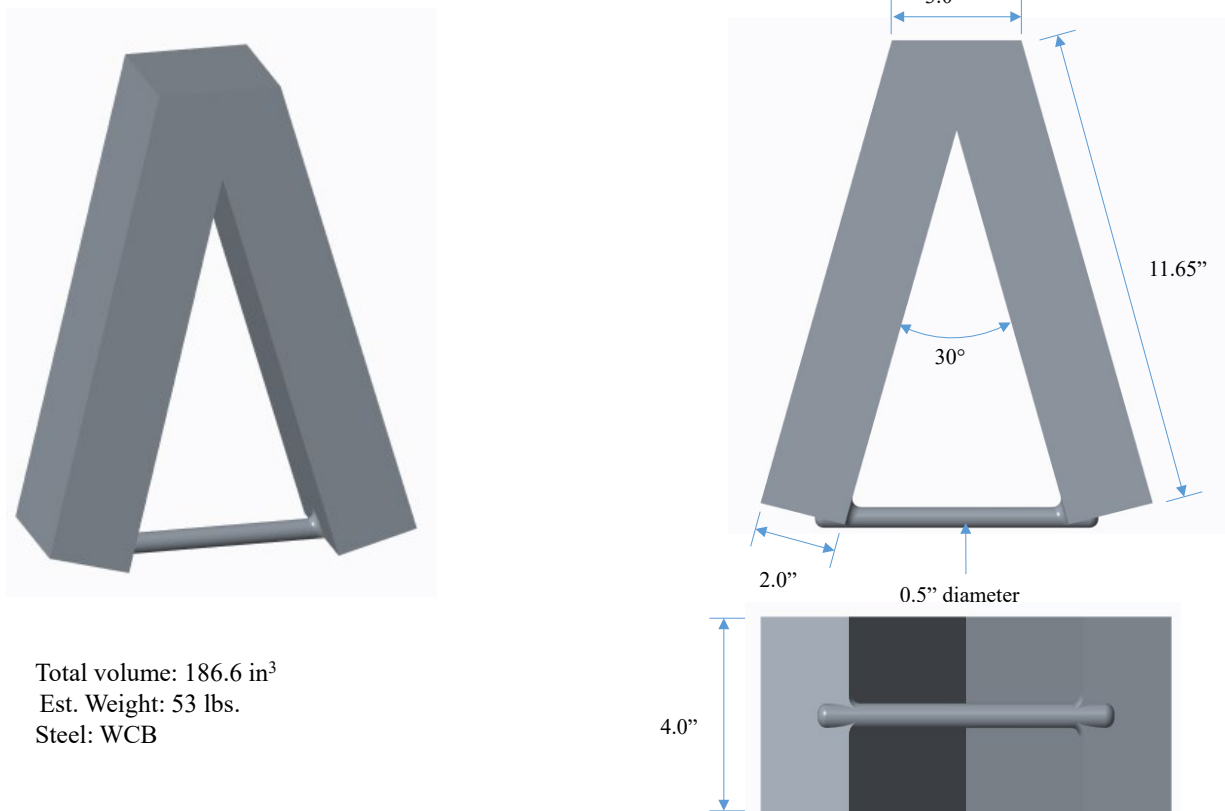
Dimensioned side and top views of the second heat experiment case B (the inverted V).
